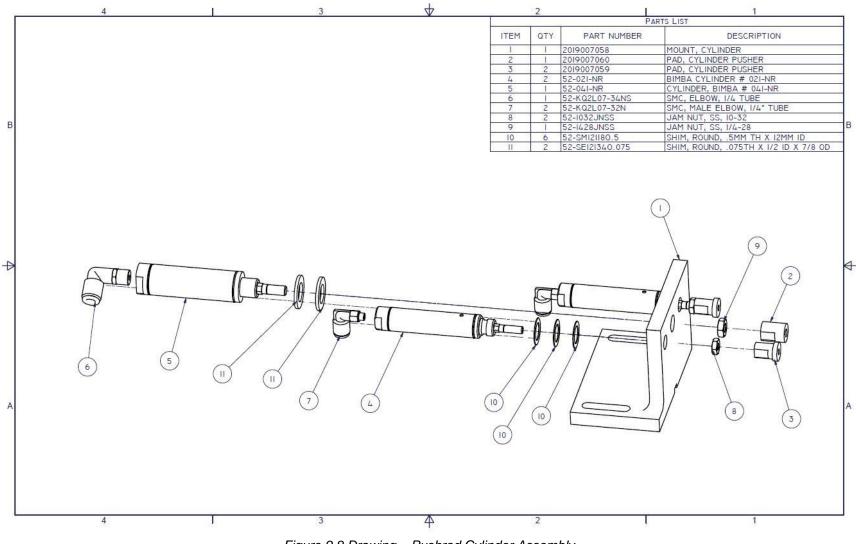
Drawing – Pushrod Cylinder Assembly
